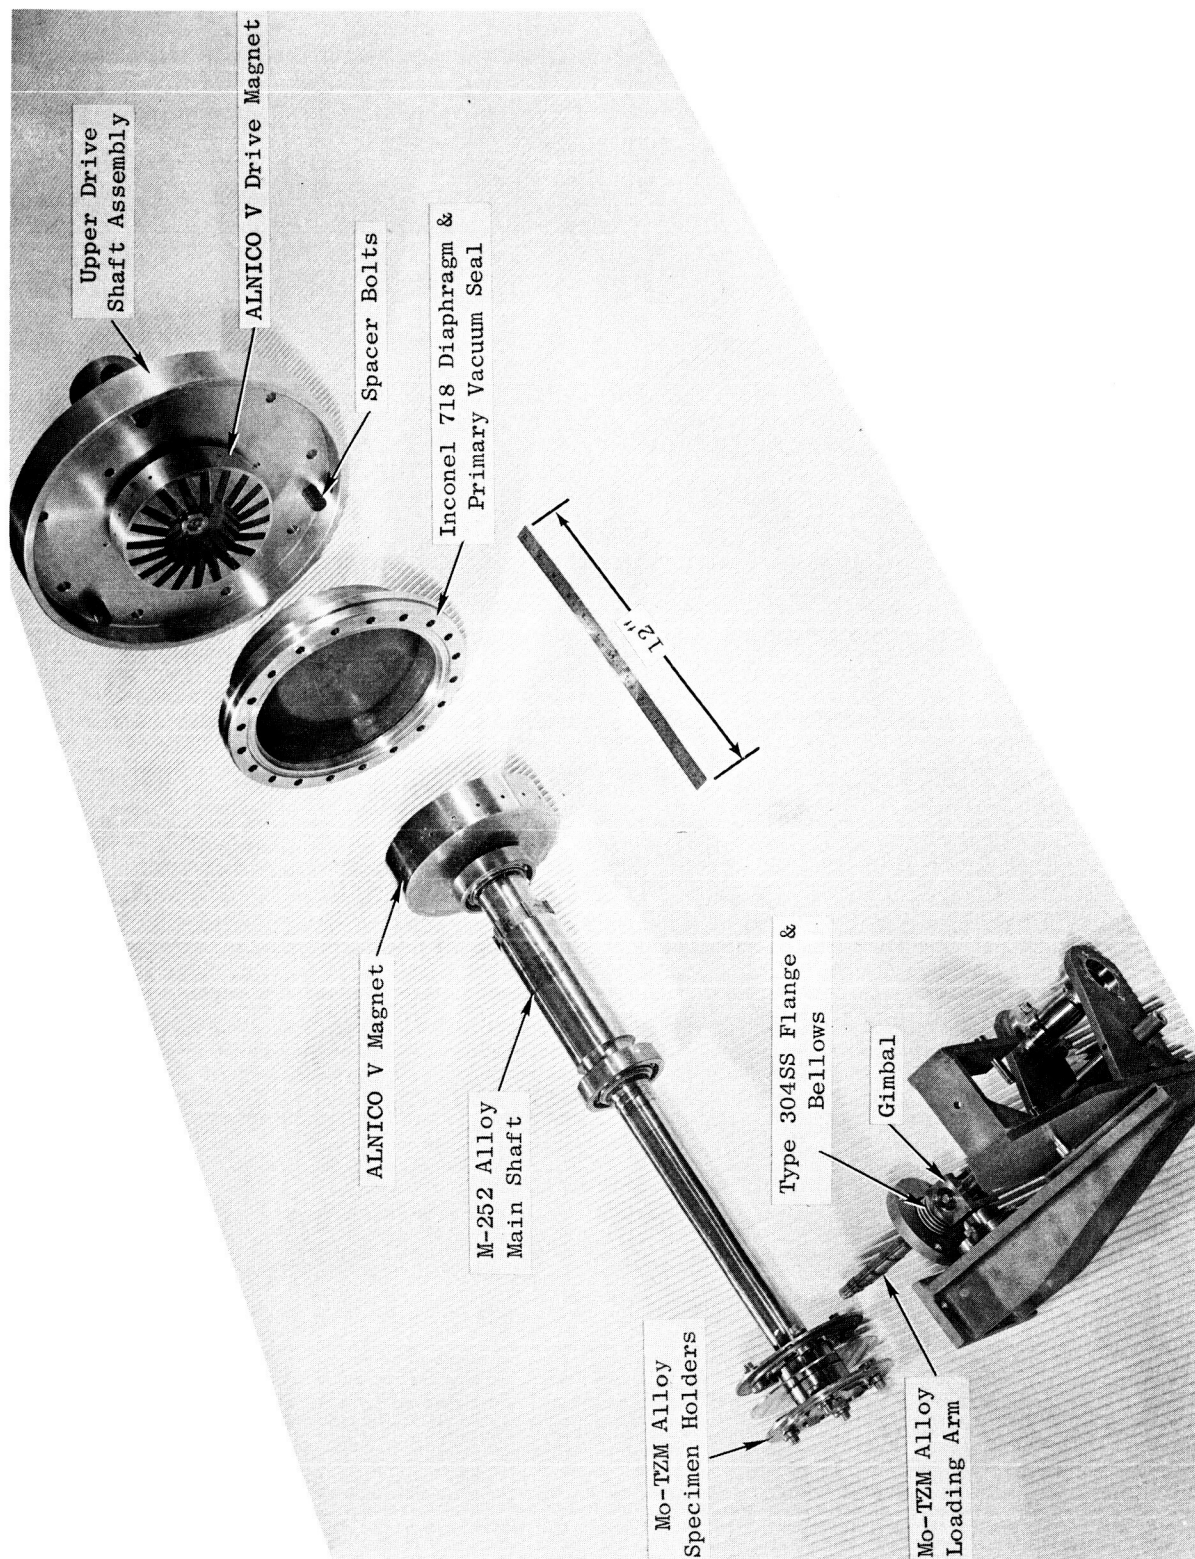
Upper Drive Shaft, Nonmagnetic Diaphragm, Main Shaft with Specimen Holders and Loading Arm Assemblies for High Vacuum Friction and Wear Tester. (C65011119)
